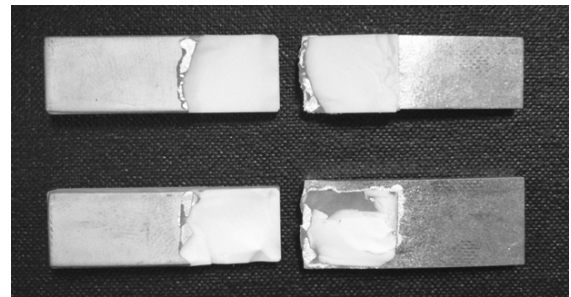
Fractured surface of Al₂O₃/Cu joint
